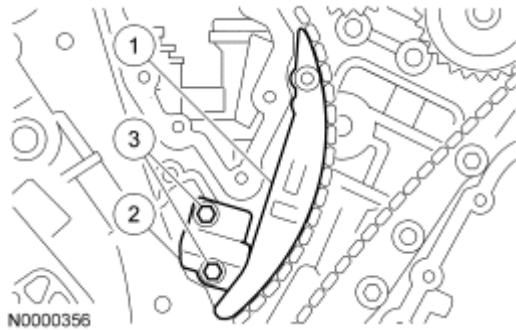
Identifying Timing Chain Tensioner Arm & Bolts
